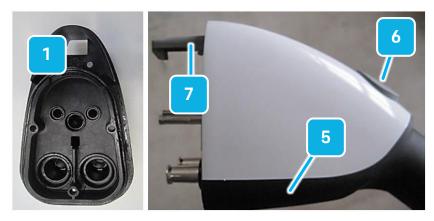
Huber + Suhner charging plug connector face CCS1, removal
